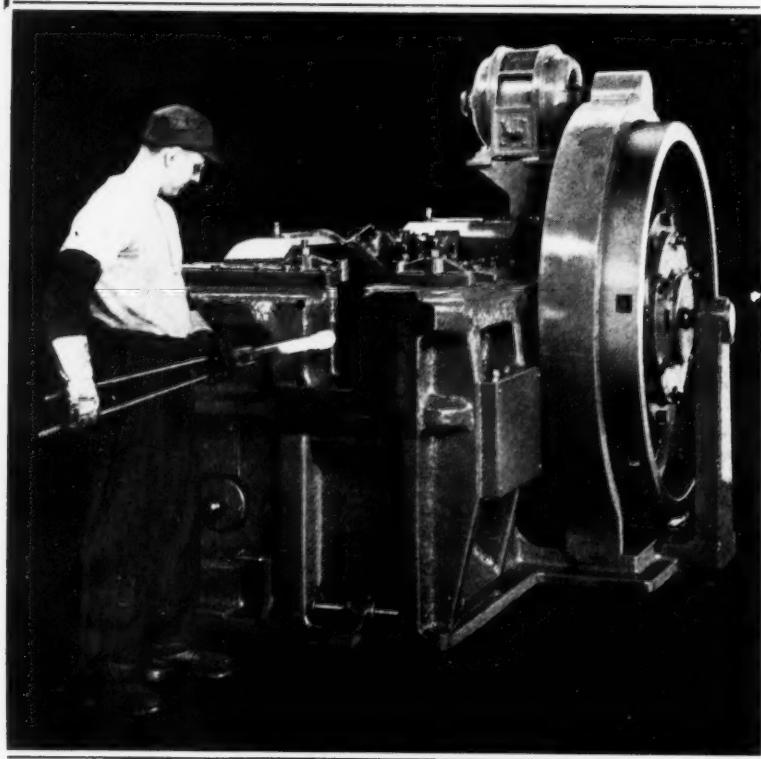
Ajax 1 1/2-inch Forging Machine Equipped with Air Clutch
